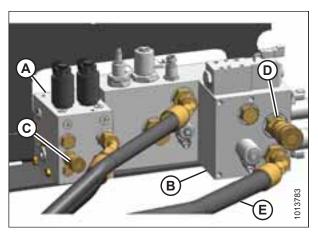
Manifolds with Reverser Manifold Configured for Auger Header
